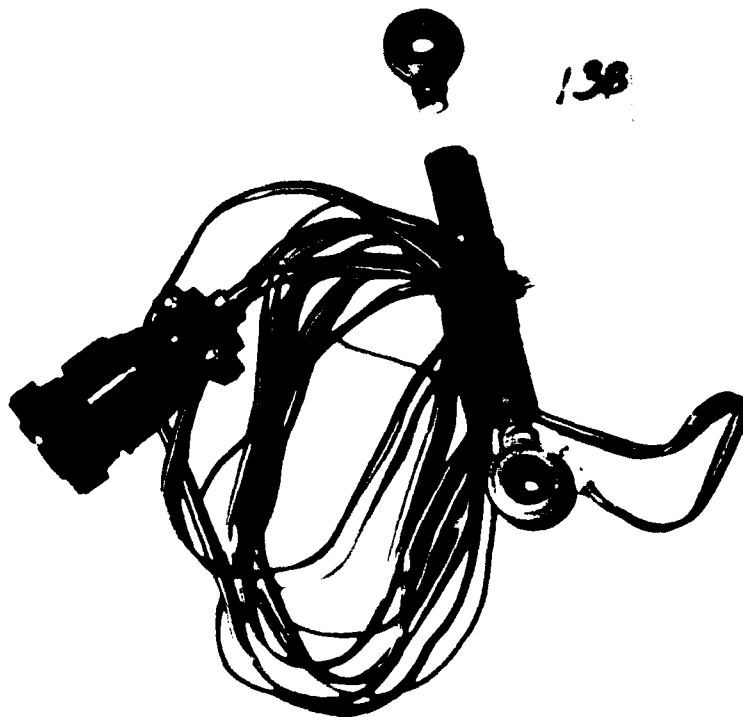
POST TEST BIN 'B' LINK 13 CLOSE UP REMOVED FROM TEST FIXTURE
